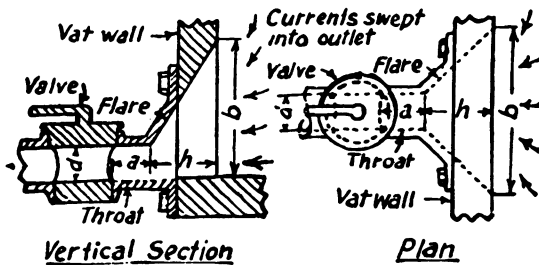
Close coupled side outlet valve connected to holder, showing design requirements.
